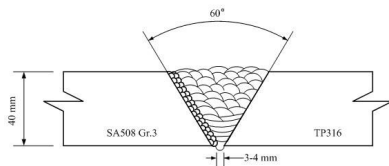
Schematics of the dissimilar metal weld of single V-grooved design.
